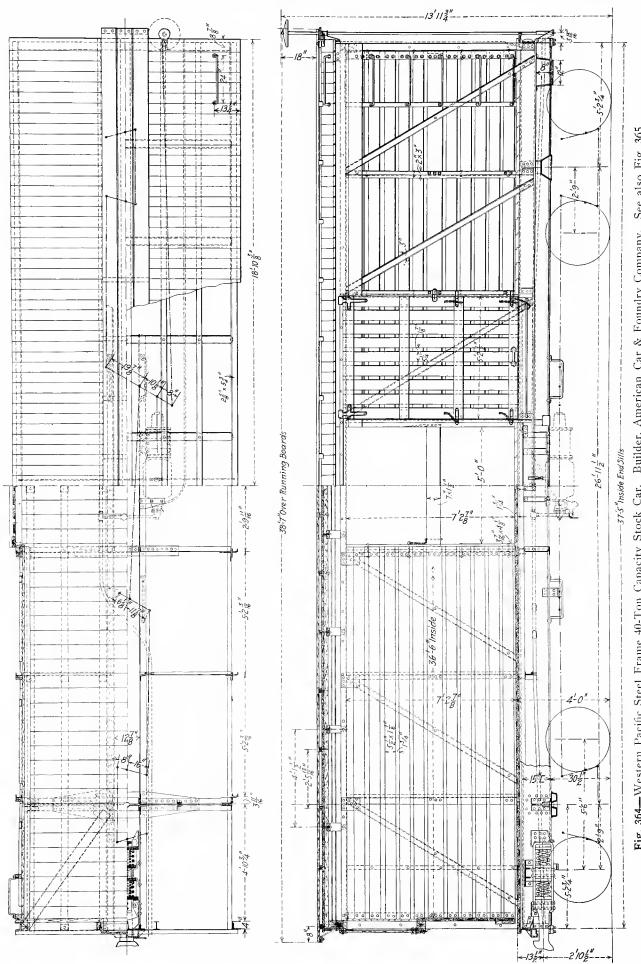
Western Pacific Steel Frame 40-Ton Capacity Stock Car. Builder, American Car & Foundry Company.
